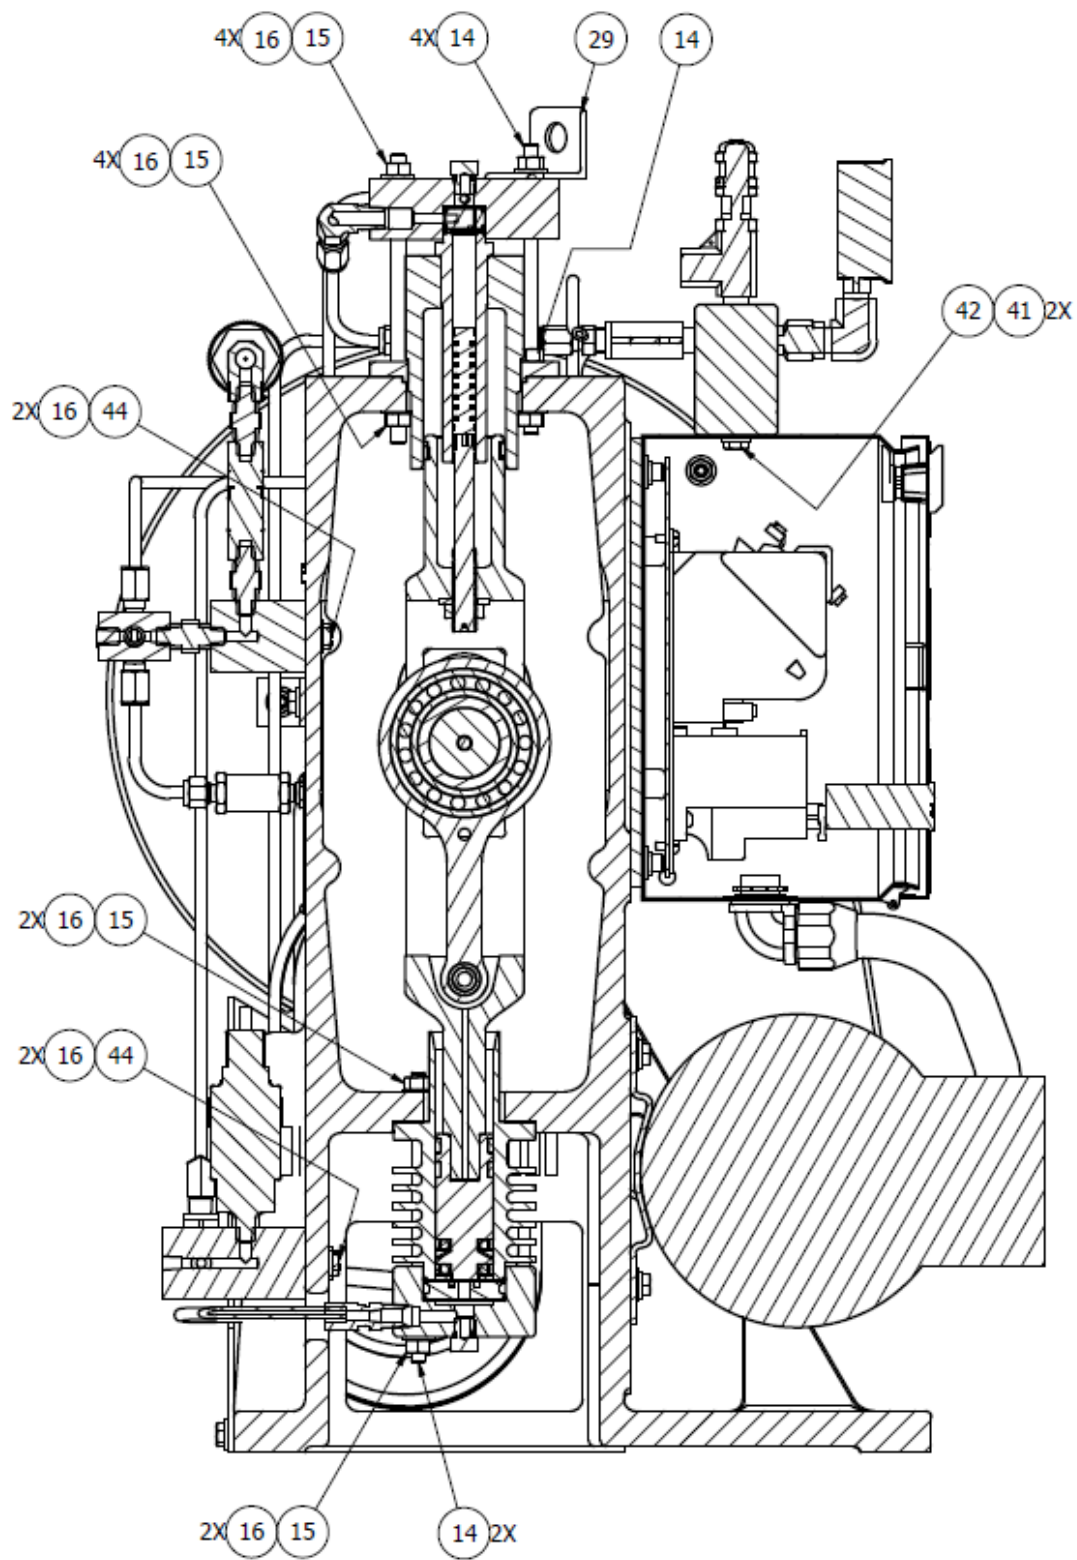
COMPRESSOR CROSS SECTION, FASTENER DETAIL
